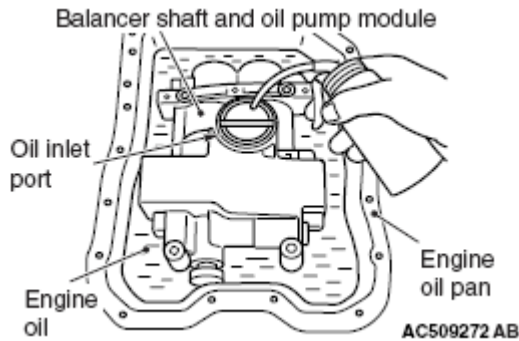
Filling Engine Oil Into Balancer Shaft And Oil Pump Module
